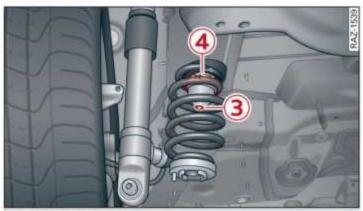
Suspension strut on rear axle: Coil spring with adjuster nut
